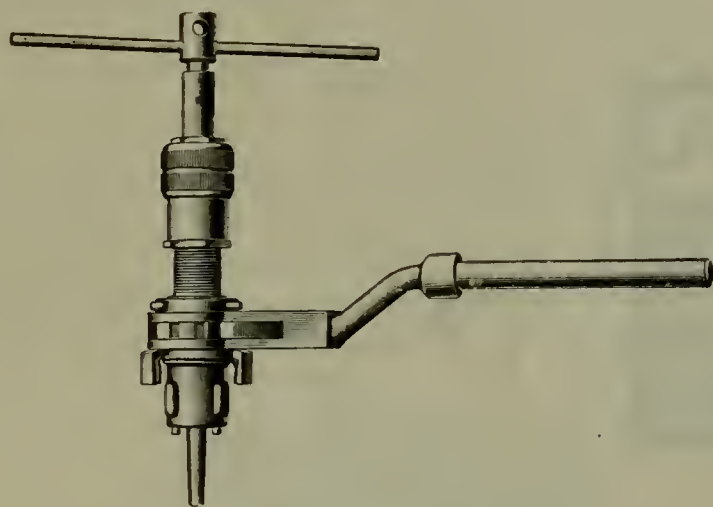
ATLAS TUBE EXPANDER; RATCHET TYPE.
